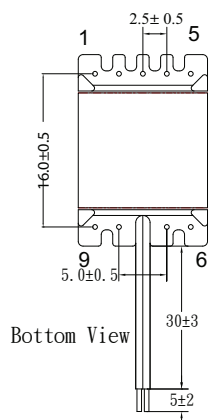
Dimensional drawing and pin placement diagram - electrical diagram
